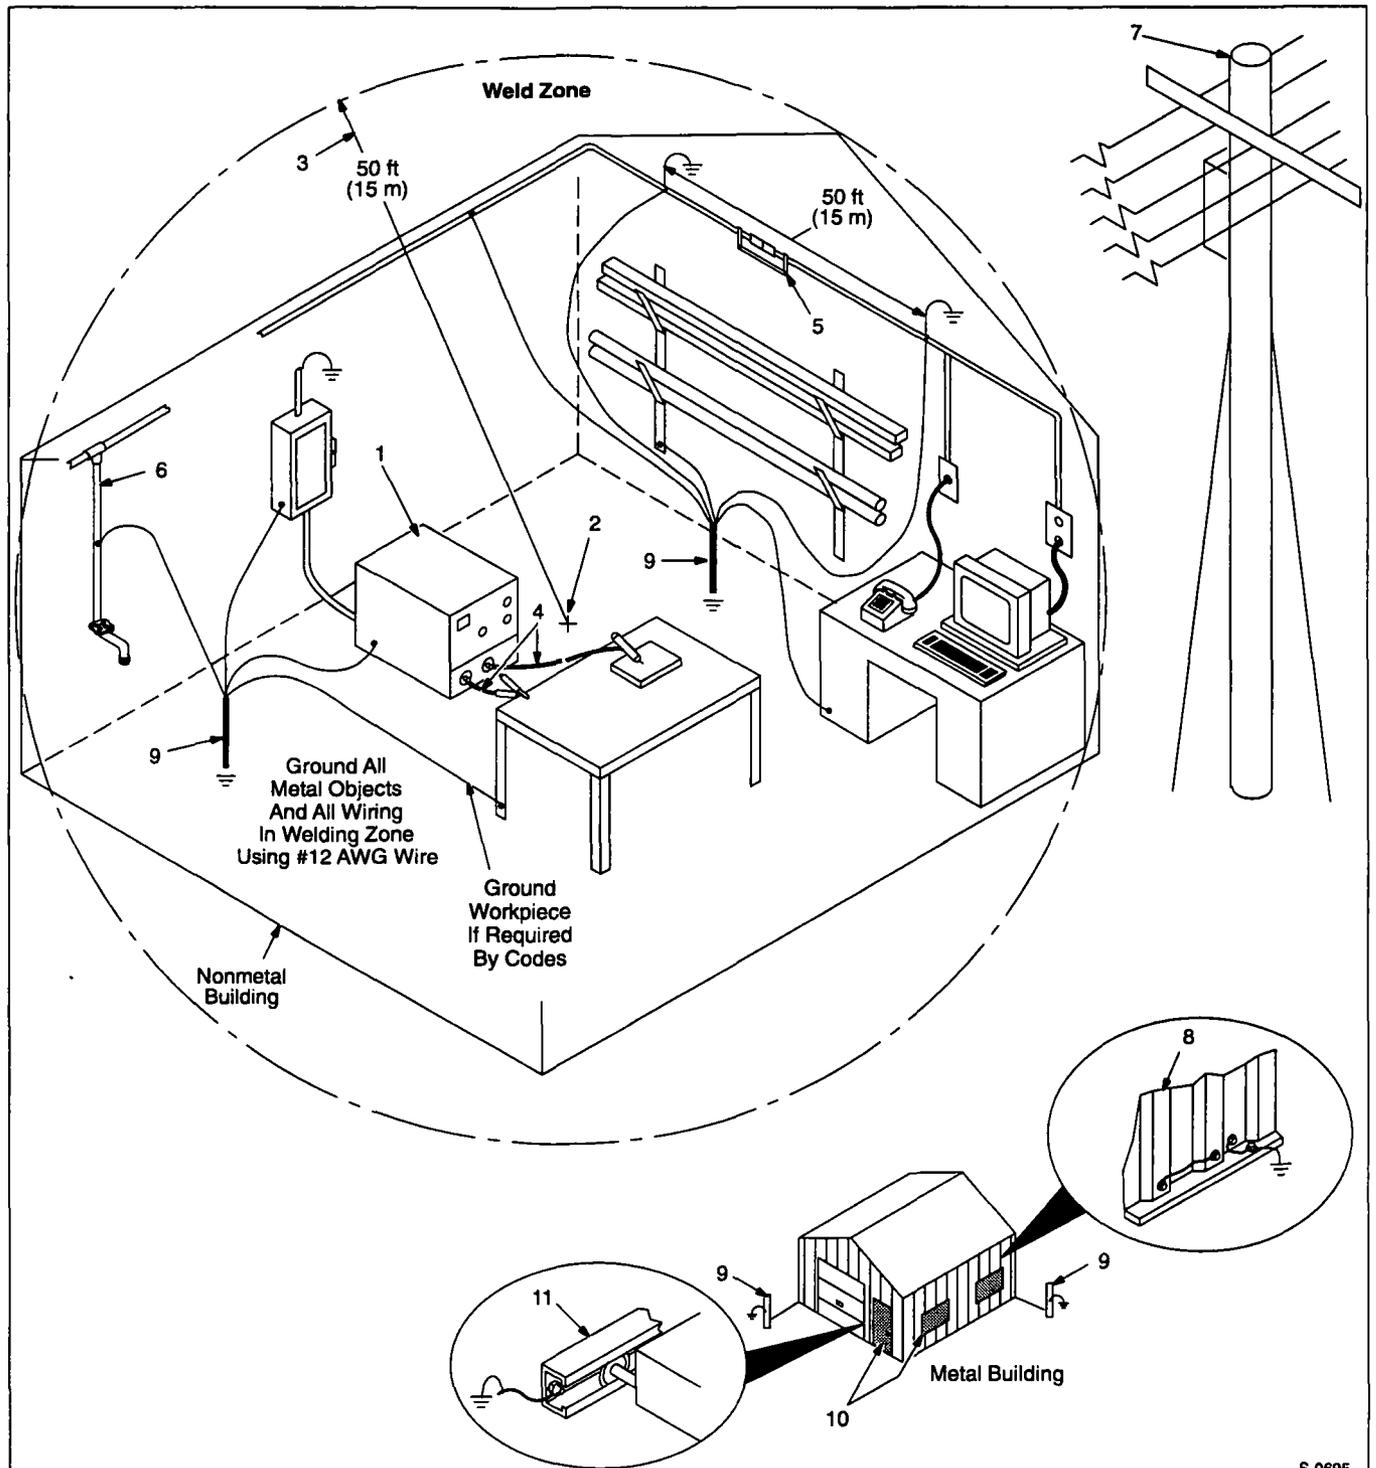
Welding Processes Requiring High Frequency
